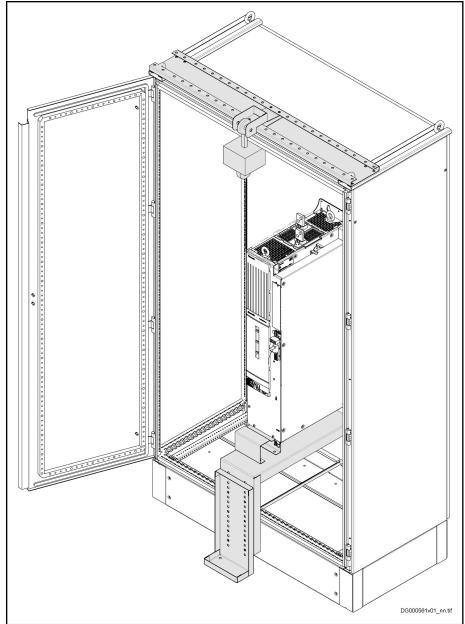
HAS08.1-008-NNN_MH mounting tools
